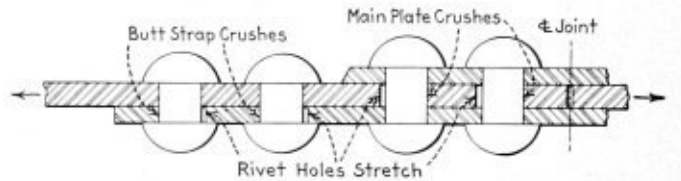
Failure of Double Butt Strap Joint by Crushing; Failure (Cr)
